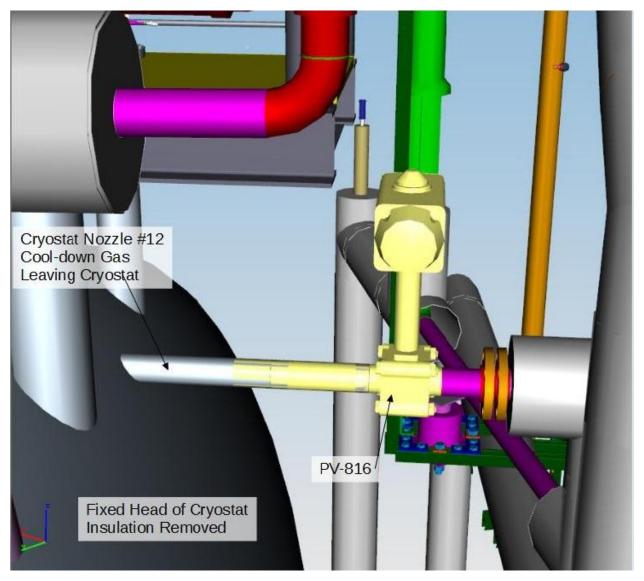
Pipe from nozzle #12 on the top of the cryostat fixed head that connects to PV816 for the return of the cool-down gas from the cryostat.
